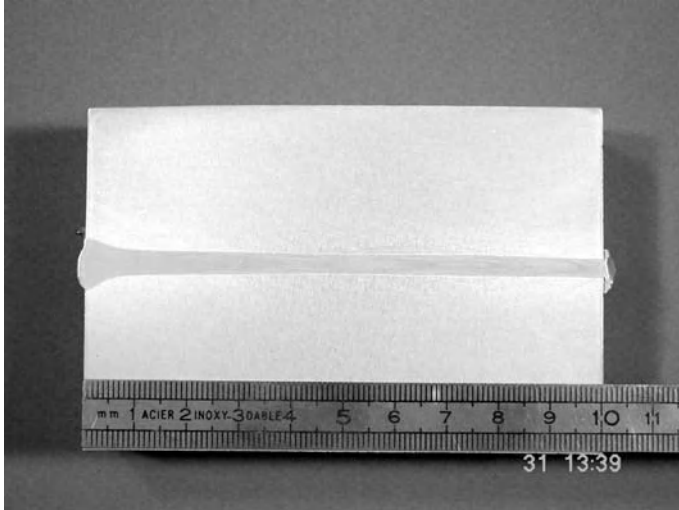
Electron beam weld of aluminum alloy 5754 (Institut de Soudure document)
